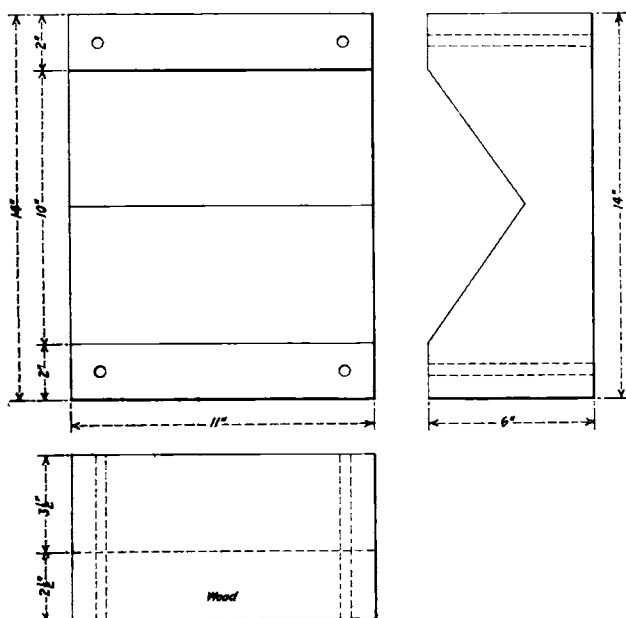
Block for Supporting Armature on Truck and Work Bench
